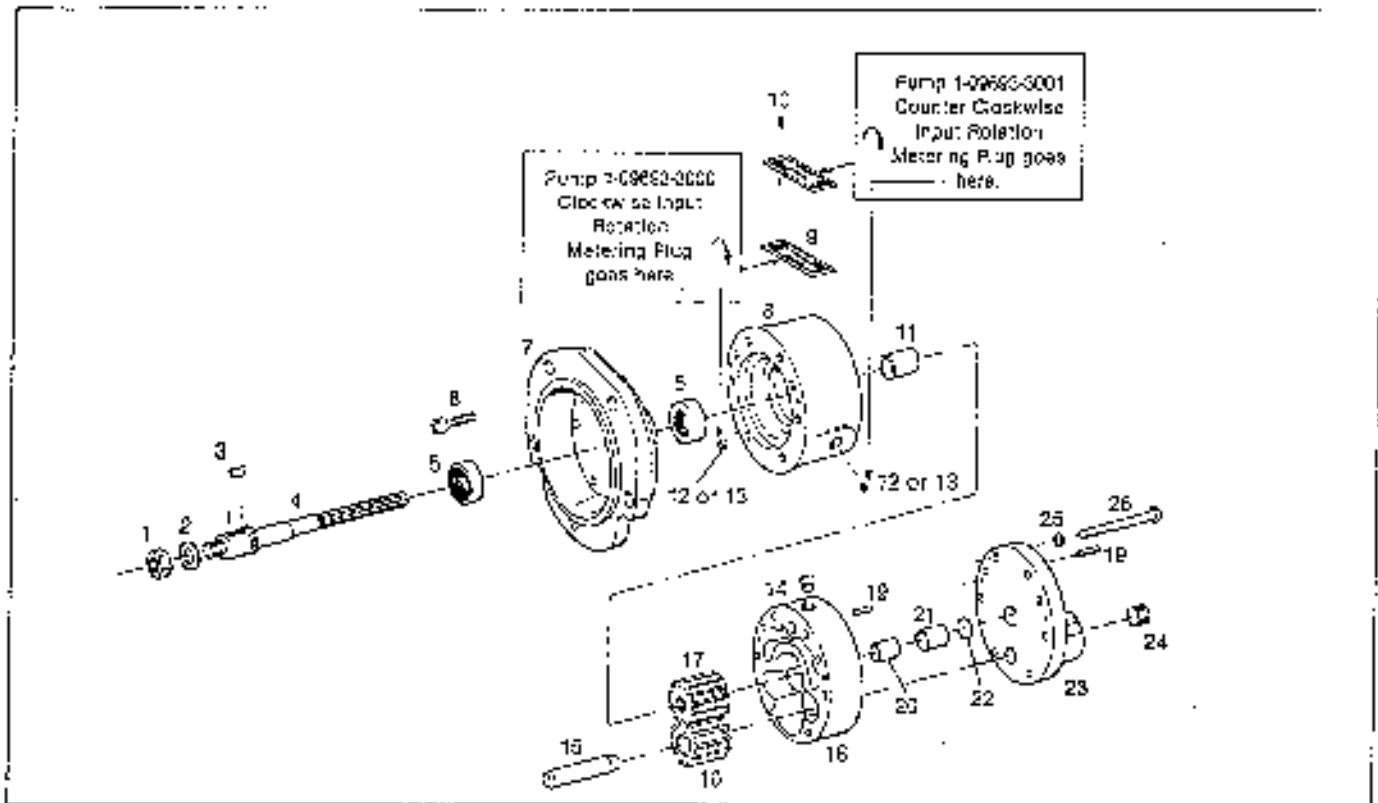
Single Pump Assembly, Direct Engine Mounted
